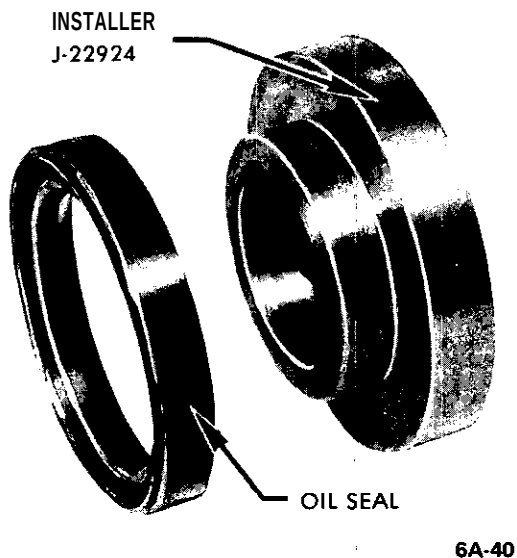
A-40 Installing Timing Cover Oil Seal on Protector
